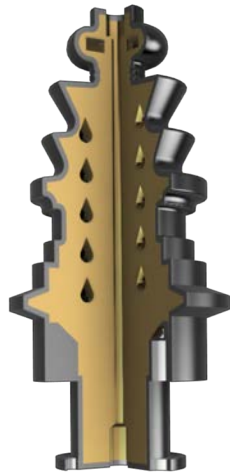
mold insert design with core printed in a different material than the tool steel surface
